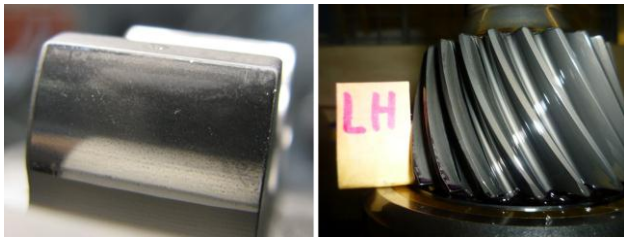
WC/C coated standard reference gear (left), WC/C coated bevel gear input stage pinion MGB (right)
